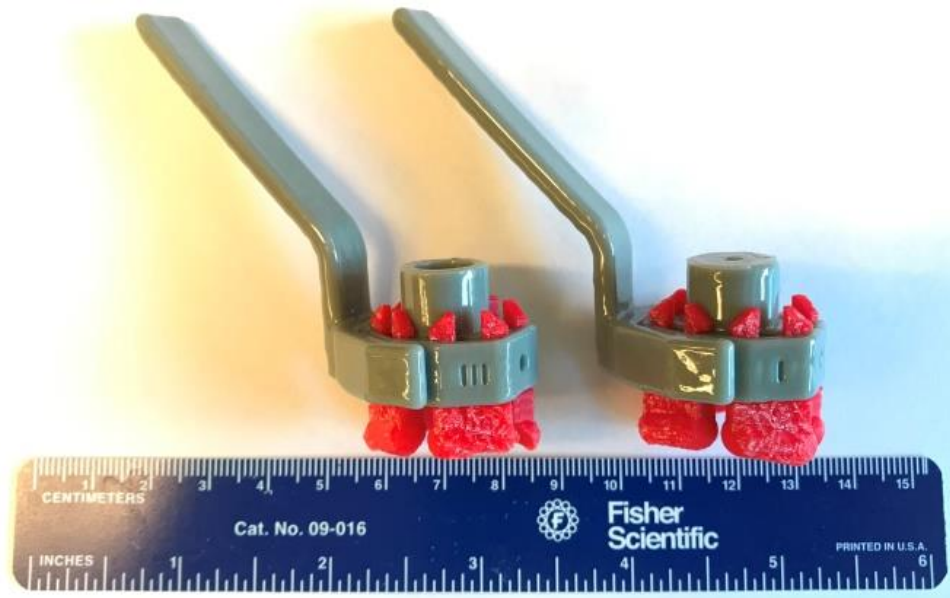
Two 3D printed surgical guide prototypes, one for each cutting tool. The contact pieces were printed in red ABS, central guide part and handle were printed in grey ABS.
